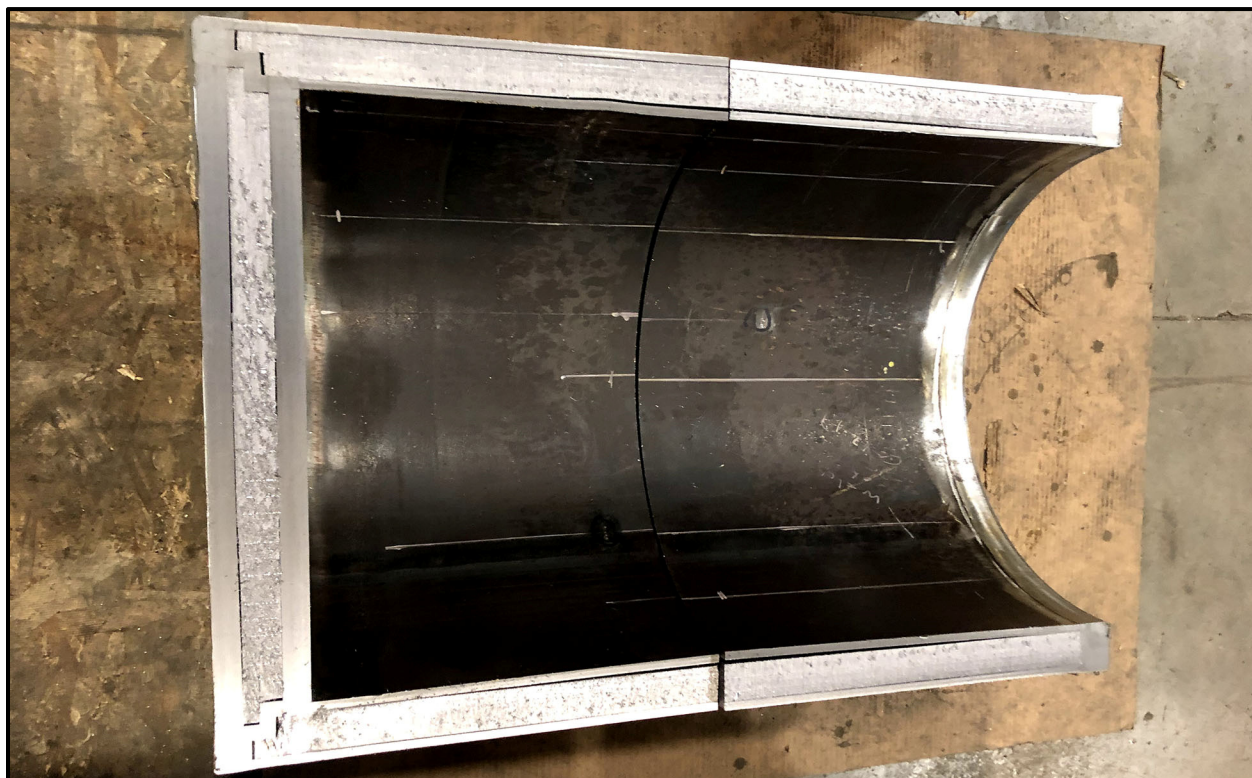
SC-30G2 18TU-02 Destructive Disassembly Overview
